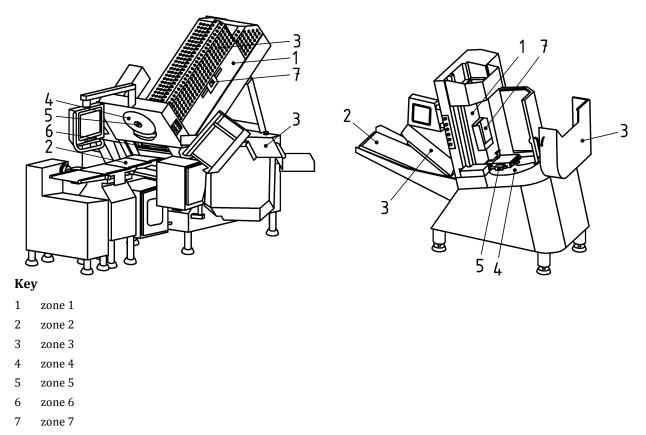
Danger zones on an automatic industrial slicing machine with manual feed
